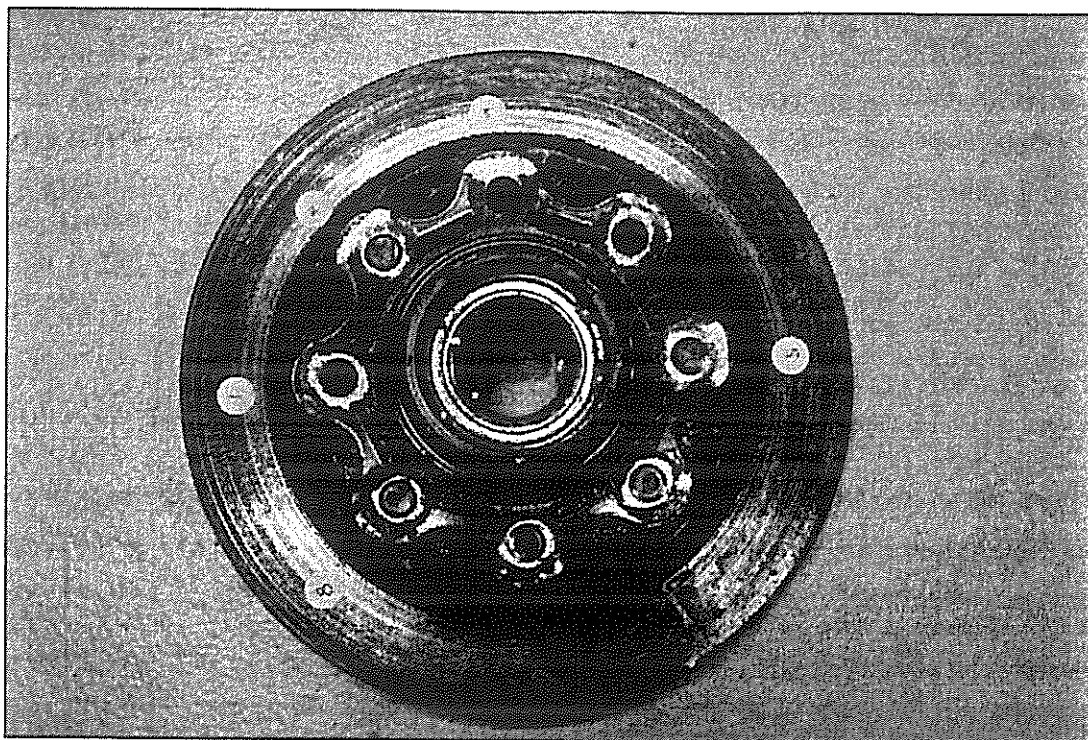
Left rear rotor showing wear on the hub mounting face in the inboard and outboard areas adjacent to the wheel bolt
